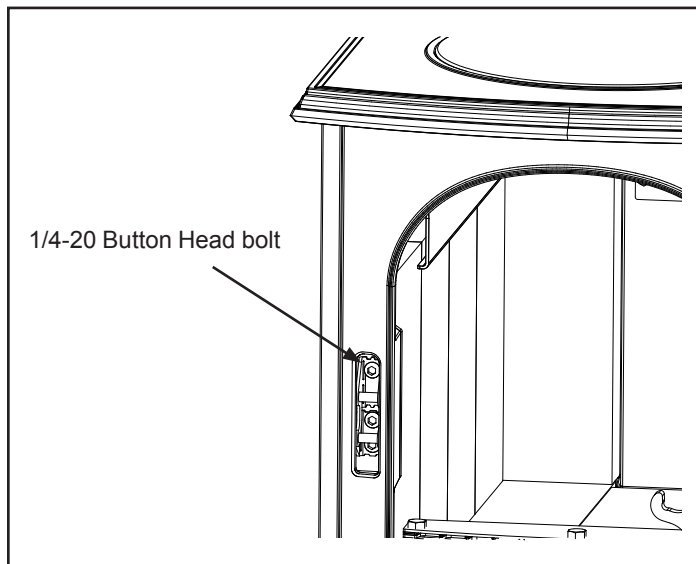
Tighten 1/4-20 Button head Bolt
